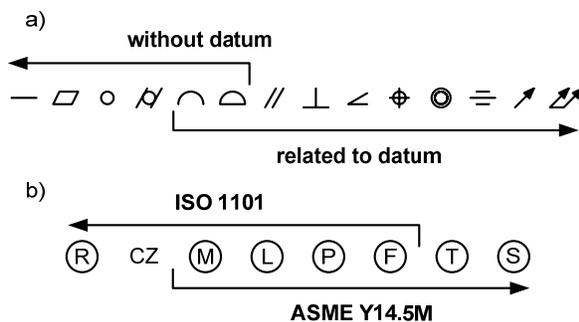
a) Geometrical tolerancing symbols;
